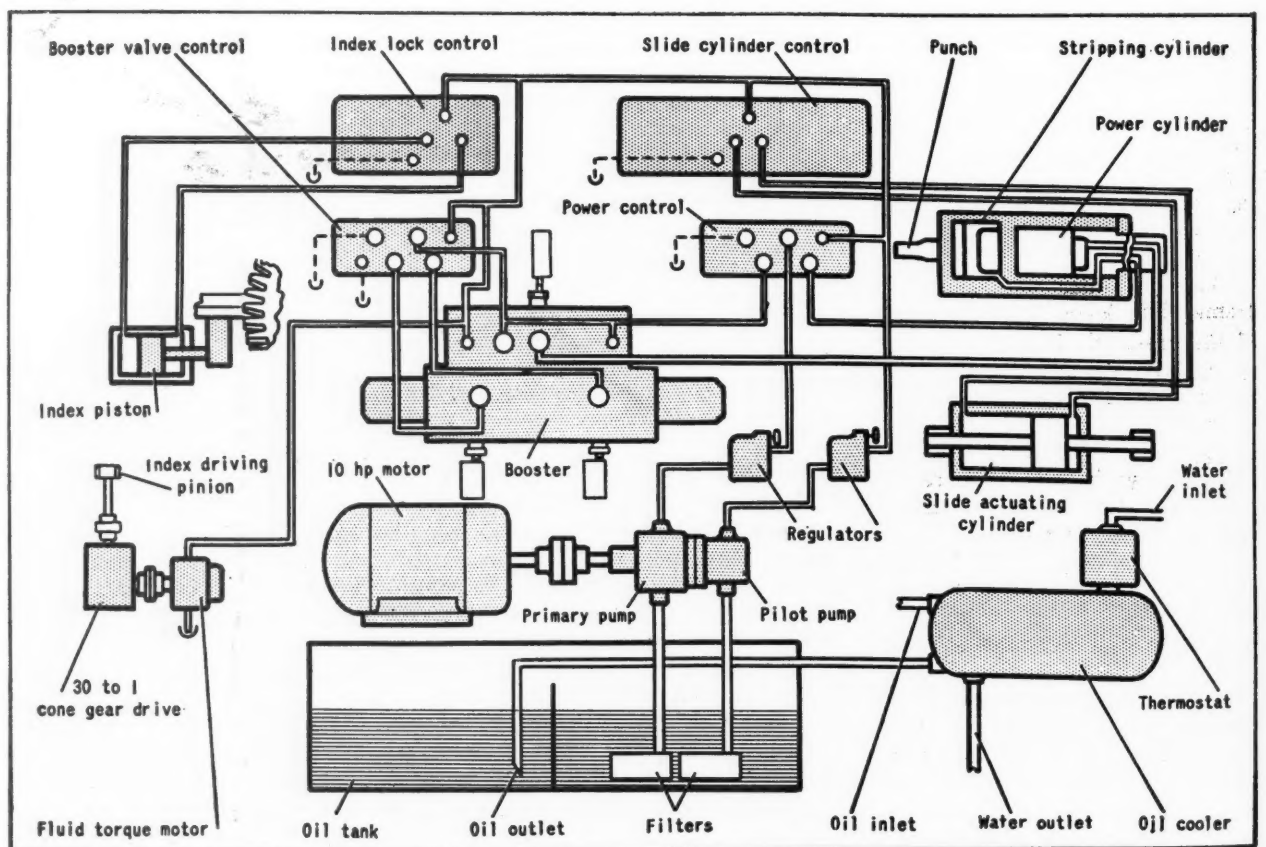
Hydraulic system of Danly piercing machine, in which special valves and fittings are employed to control the extremely high pressures used. The pressure applied to the punch in piercing the work is a multiple of the primary pressure, and is determined by the characteristics of the booster
